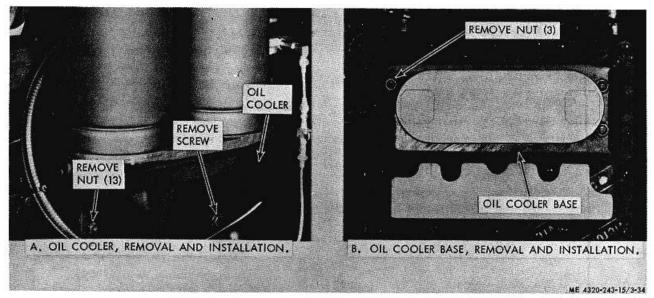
Oil cooler and oil cooler base, removal and installation.
